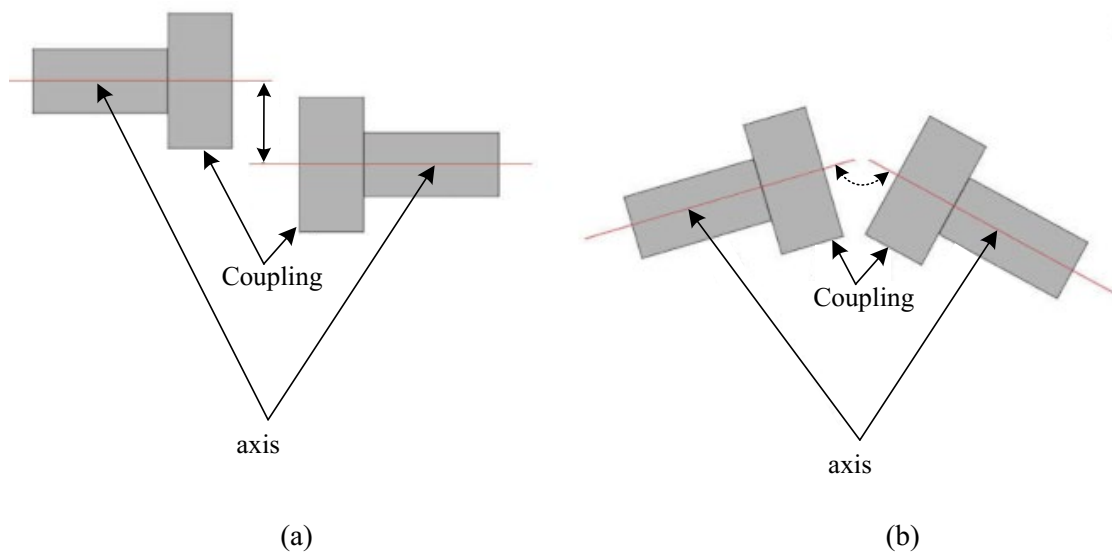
Examples of misalignment fault in shaft: (a) Parallel shaft, (b) Angular shaft [15].
